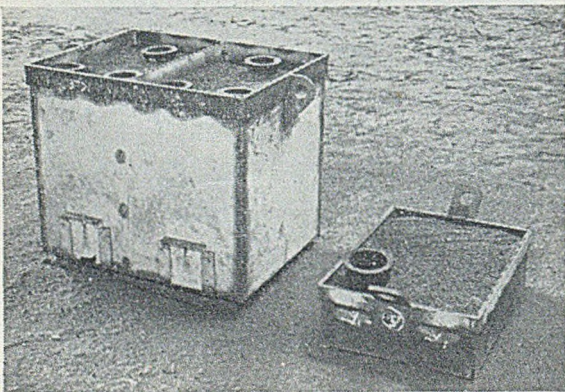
Bedding Boxes, with Moulds prepared for Casting.
